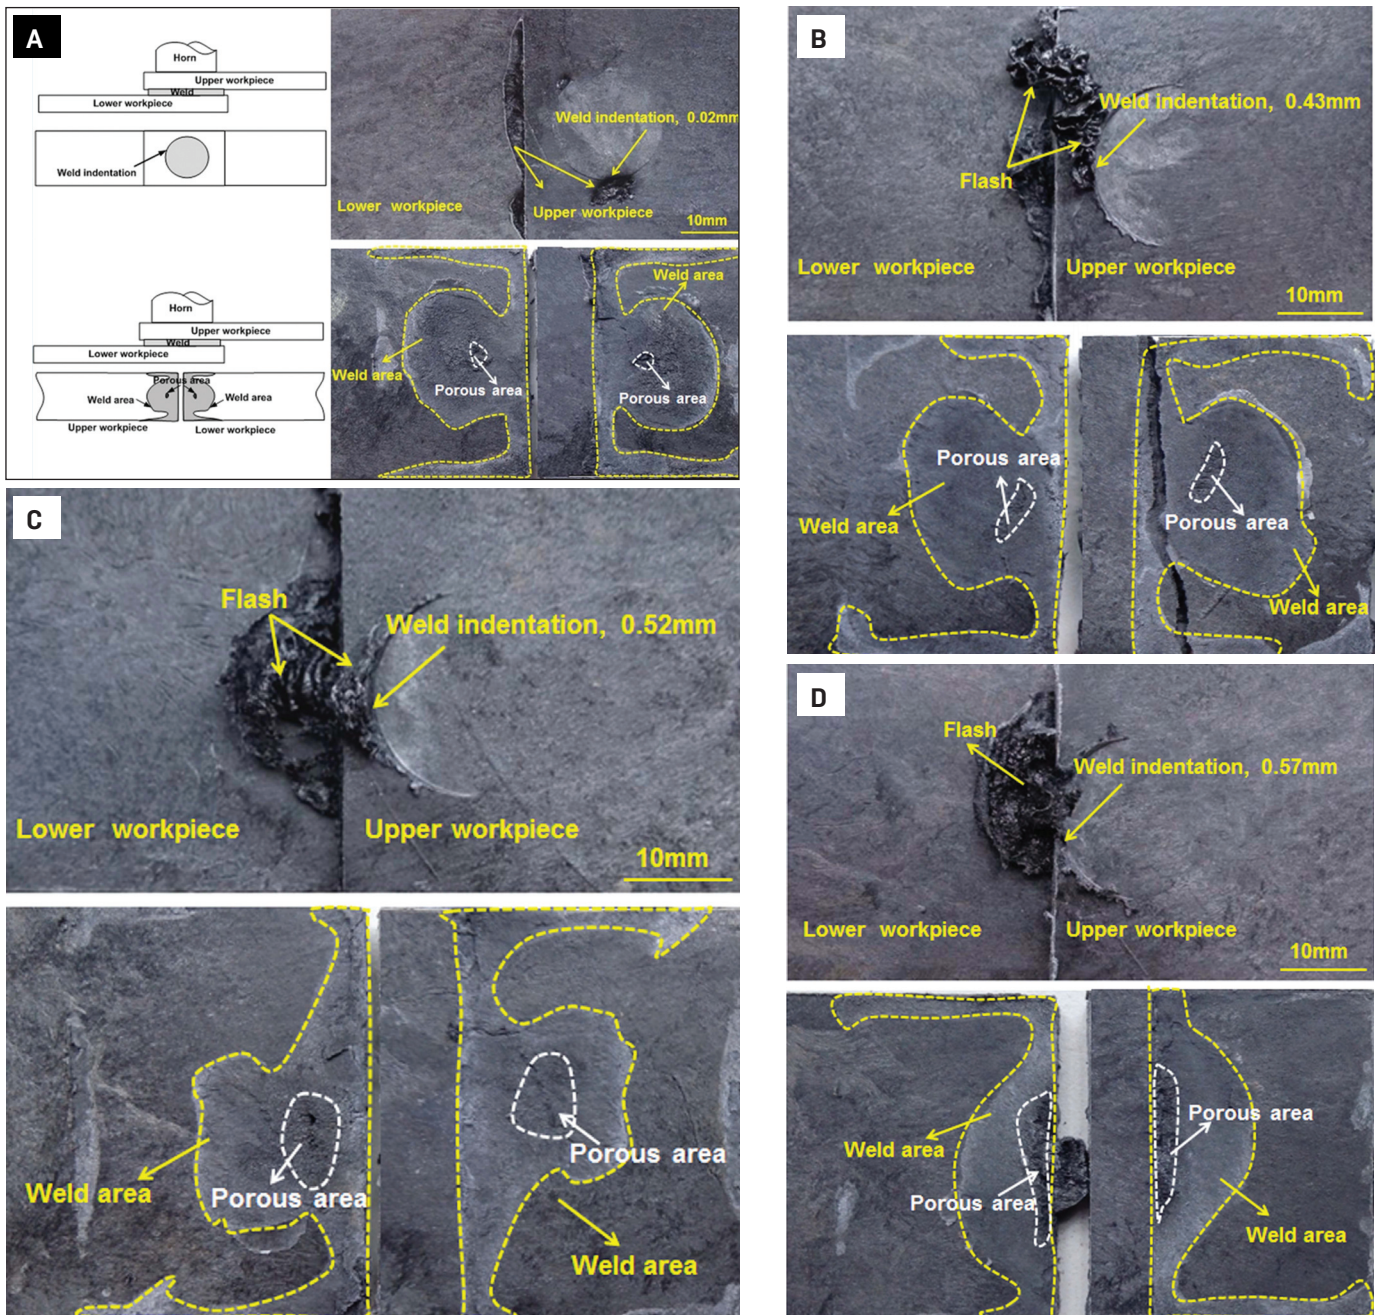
Effect of horn axial misalignment on the weld indentation and weld area of the ultrasonic welded 4-mm- (0.16-in.-) thick C_f/PA 66 composite: A — 0; B — 2; C — 4; D — 6 deg.
